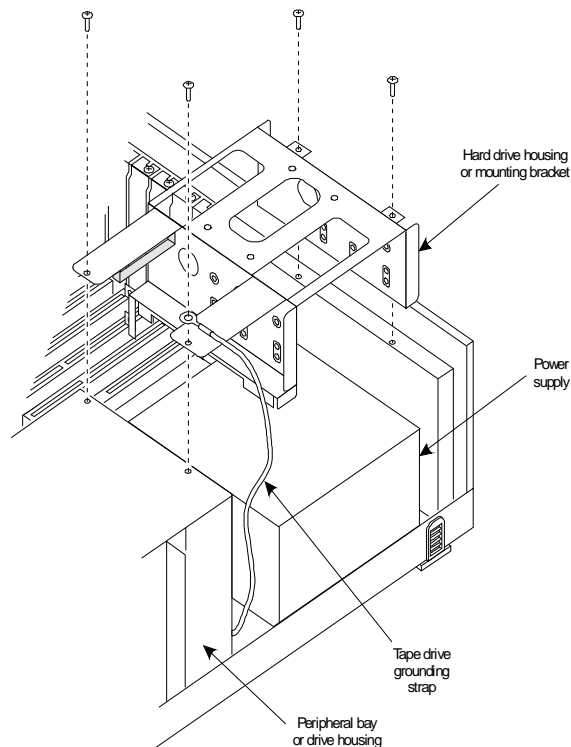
Removing the Second Hard Drive Housing or Mounting Bracket
